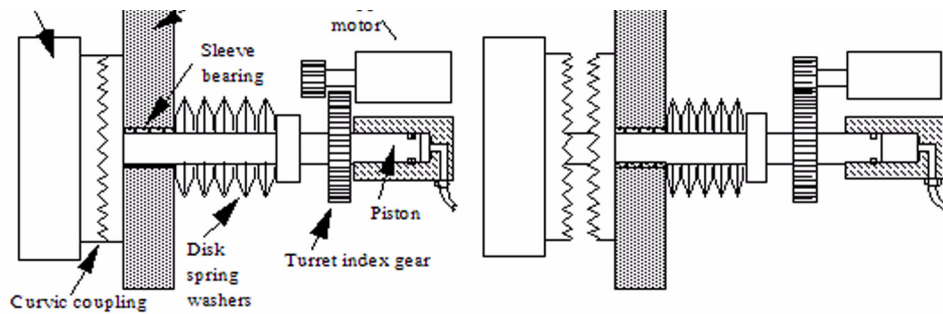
Schematic of a typical turret indexing and locking mechanism in engaged and disengaged positions using a curvic coupling (Courtesy of Hardinge Brothers, Inc. from Slocum [4])
